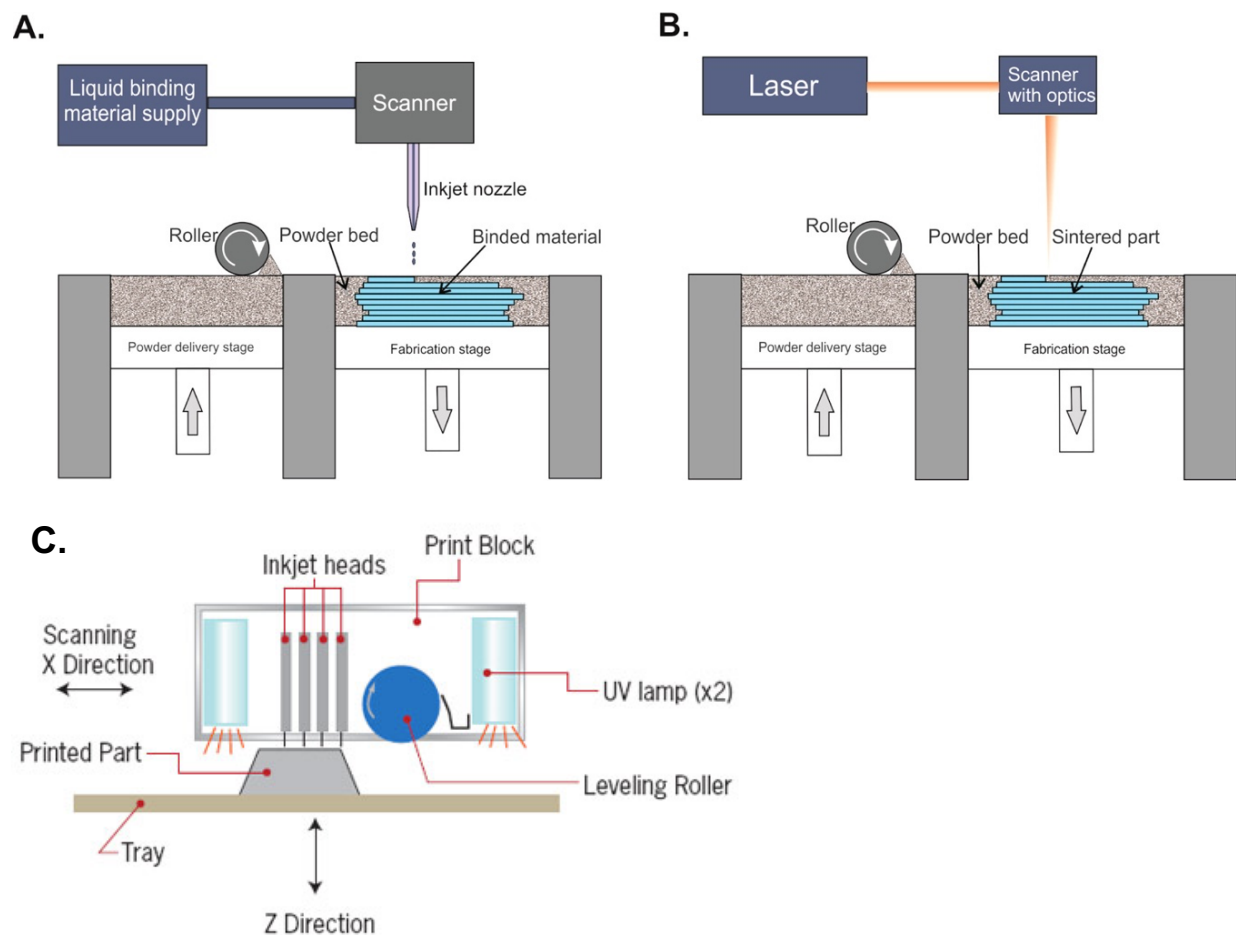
Powder-bed fusion 3D printing techniques. Schematic drawing of (A) inkjet printing and (B) selective laser sintering, and (C) polyjet 3D printing. Reused from [55] and [60].
